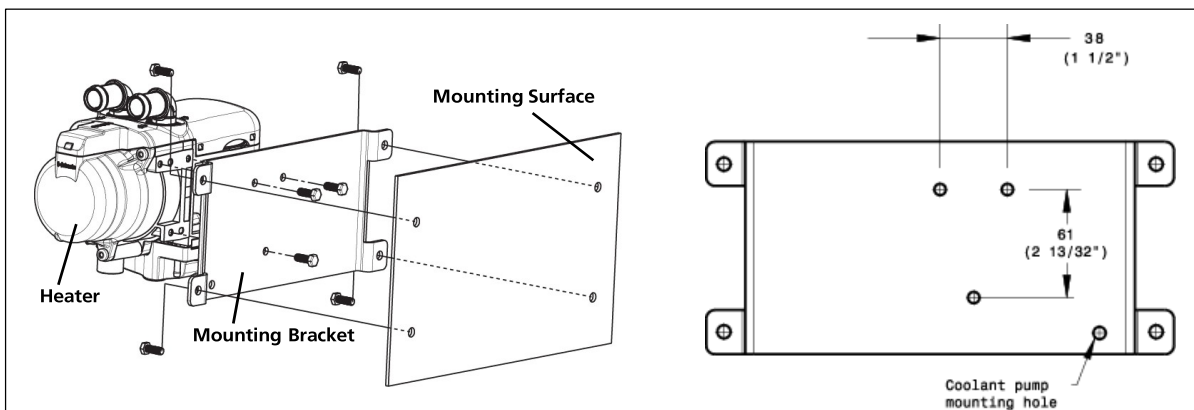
Exploded View Heater to Bracket Layout & Dimensions
